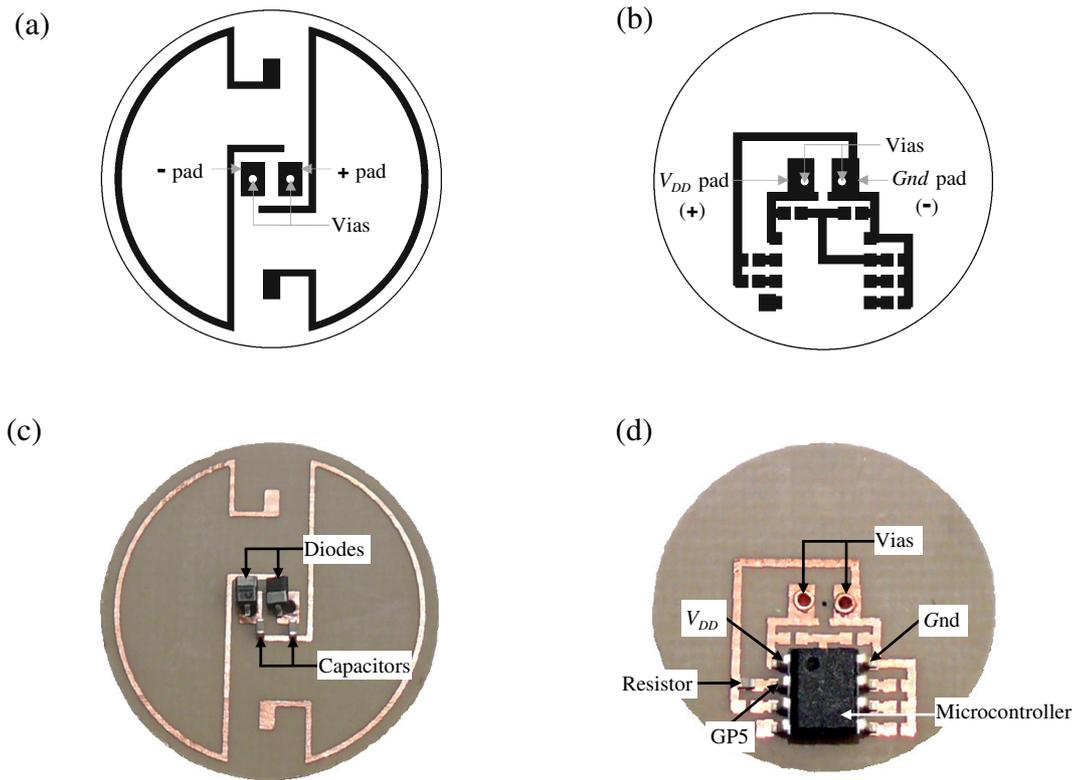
(a) Layout top side and (b) back side; pictures of the assembled board: (c) top and (d) back side.
